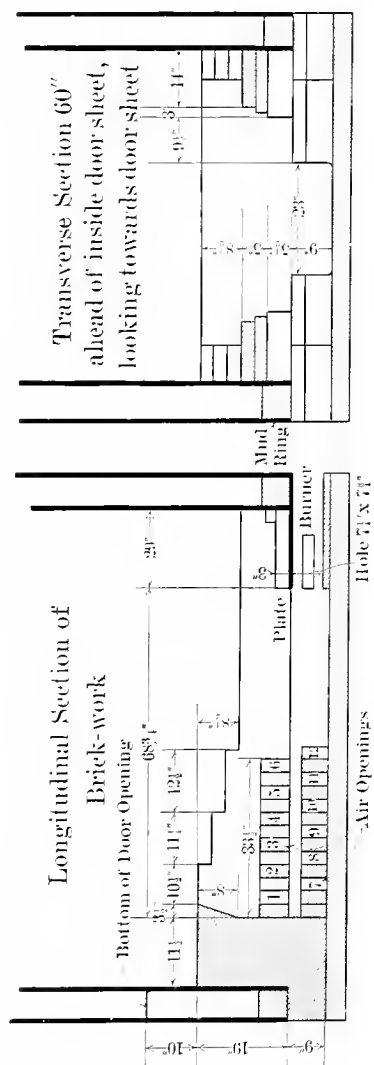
Arrangement of brickwork in fireboxes for tests when oil was used as fuel.
